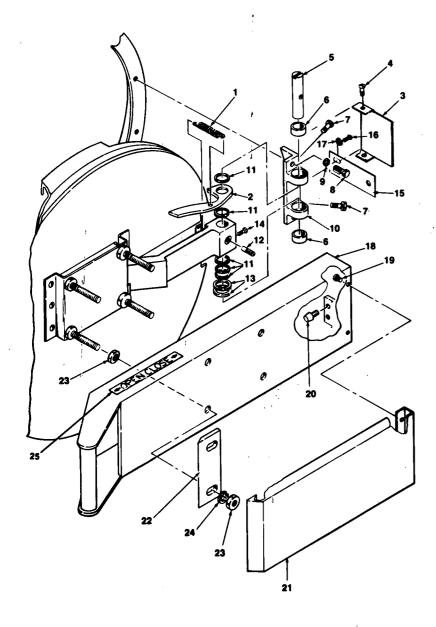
DOOR ASSEMBLY (Part 1 of 2).
